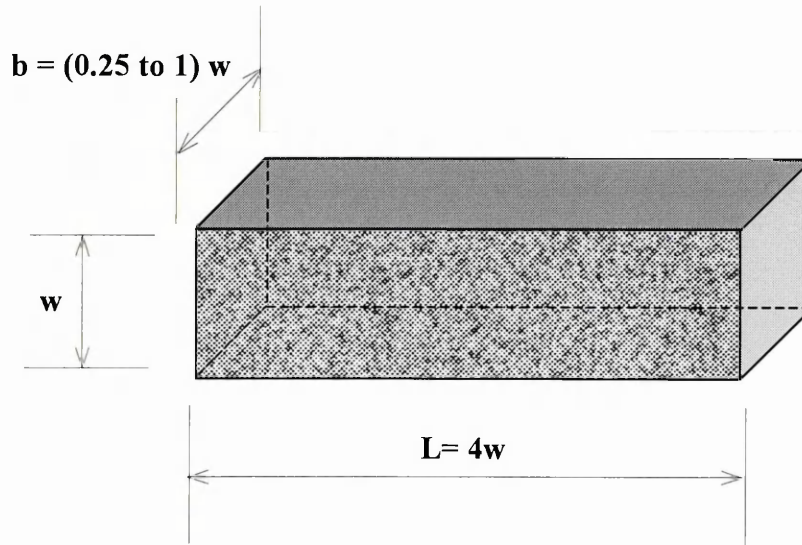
Standard dimensions for a bending test specimen¹³⁵
